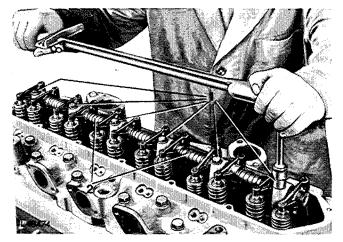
Tightening Rocker Arm Shaft Assembly
